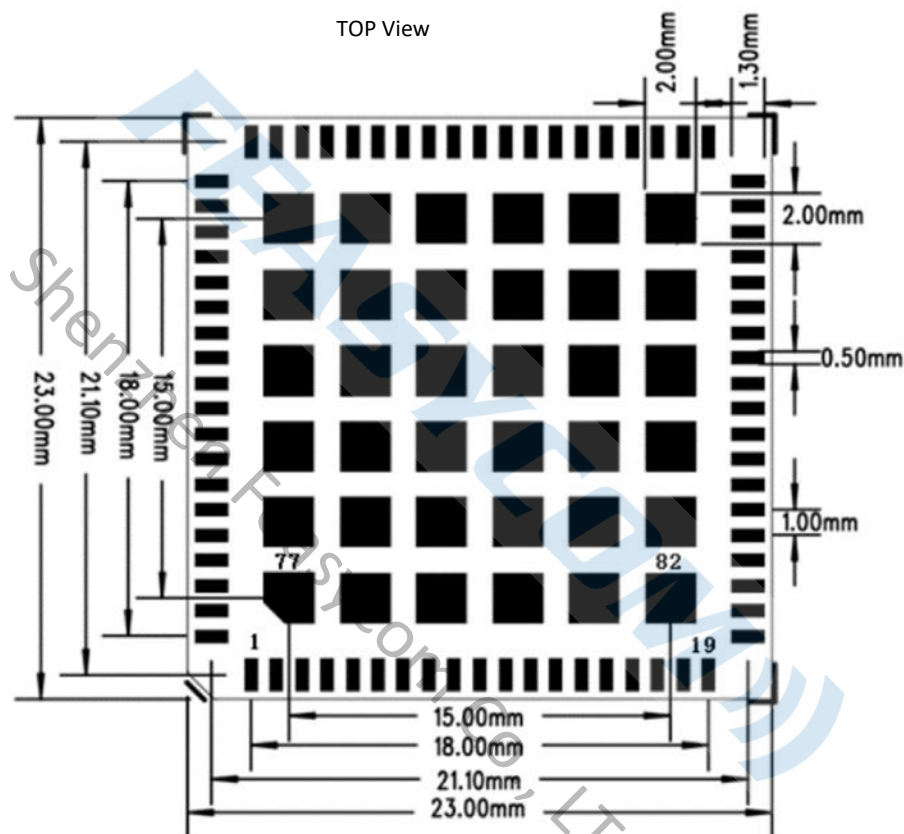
FSC-BW3051 footprint Layout Guide (Top View)
